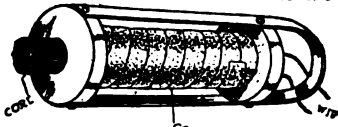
Another magnetic lifter — which is useful for removing a nut which may have fallen into cylinder or other inaccessible place is shown in illustration. Simply touching the file with the magnet makes a magnet out of the file (a long rod may also be used instead.)
